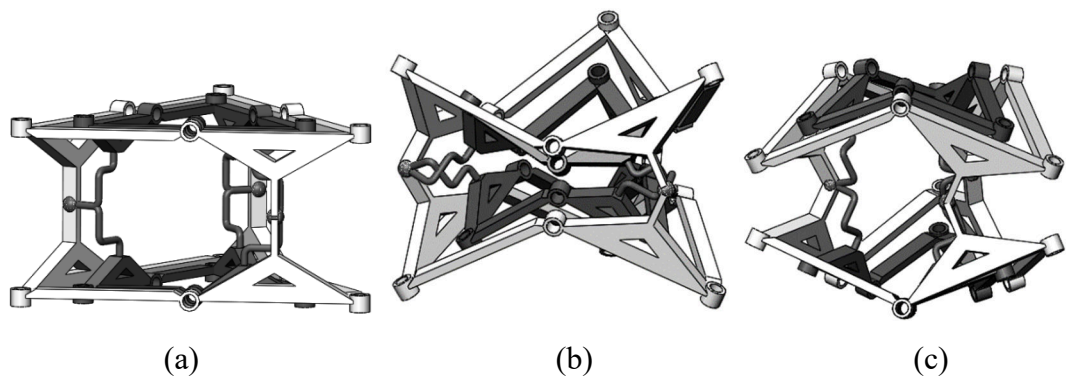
The double-layer prism mechanism constructed using Bricard linkages: (a) initial posture; (b) outward deploying; (c) inward deploying
